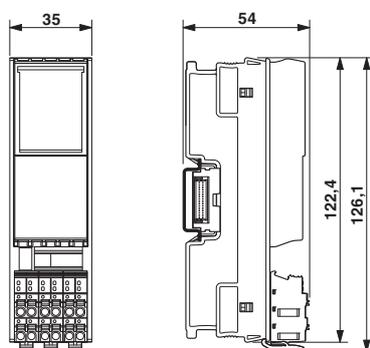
Nominal dimensions of the H housing with one terminal field and short connectors
